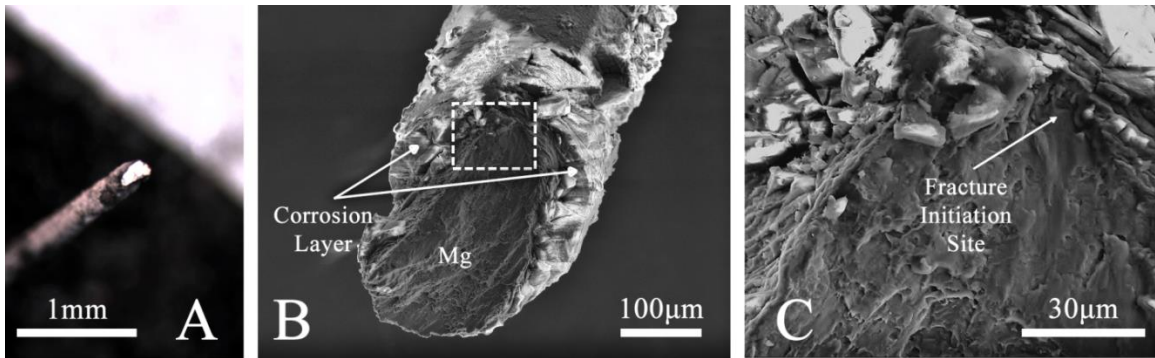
Optical and secondary electron images of magnesium fracture surfaces. The stereomicroscopic image of the fracture surface of a corroded magnesium wire (A) shows contrast between the lustrous magnesium core and the dull corrosion products. An SEI of the same fracture surface (B) showed relatively dark magnesium core surrounded by a bright (charging) corrosion layer. A close-up view (C) of the same wire (field of view marked by the dashed box in (B)) shows the suspected fracture initiation site.
